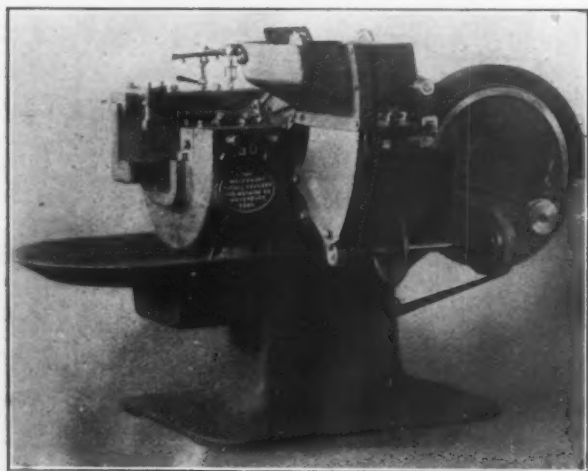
The No. 30 Thread Roller with Hopper Feed, Built by the Waterbury Farrel Foundry & Machine Company, Waterbury, Conn.
